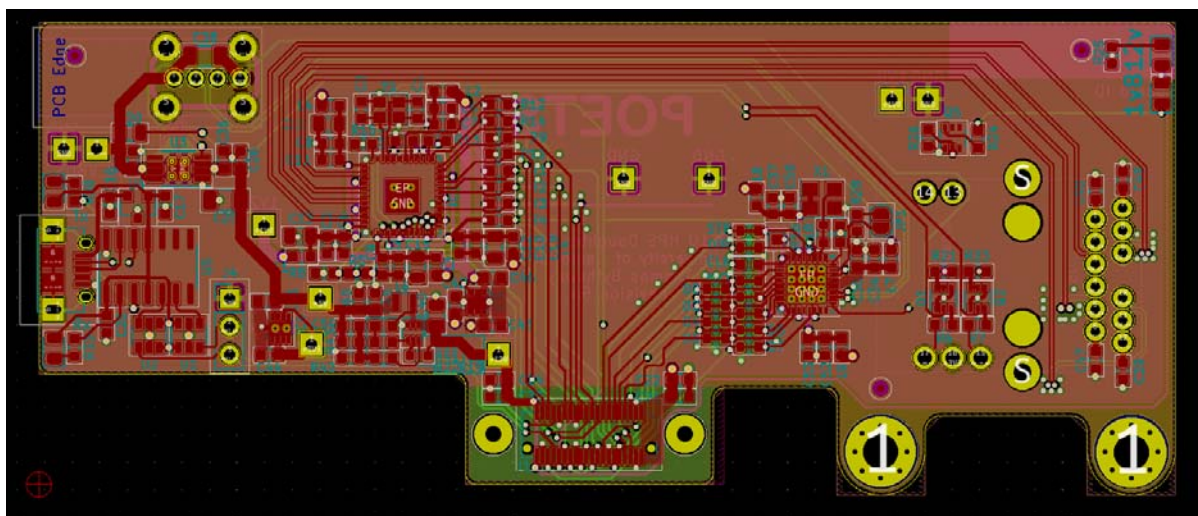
a: Final I/O expansion PCB for the Stratix-10 DE10Pro board.
